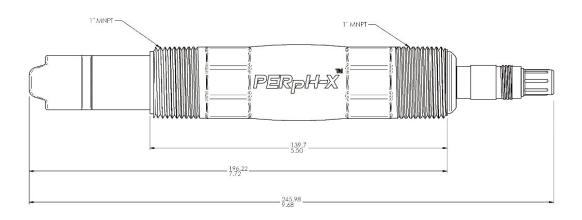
Rosemount 3500P and 3500VP sensor dimensional drawing
